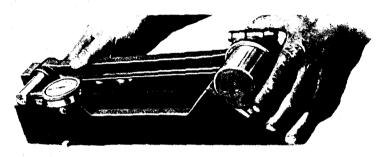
Aligning Straight Connecting Rod with Gauge 71969
